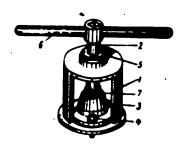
Flug for Pressing the Ball Bearing Housing With the Shaft and Centrifuge out of De-aerator
